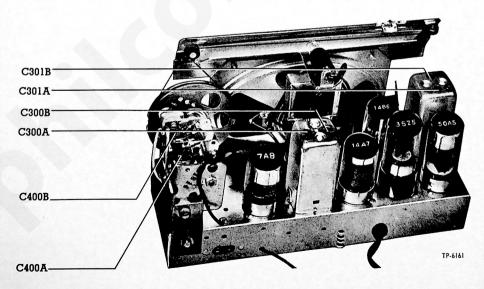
TOP VIEW, SHOWING TRIMMER LOCATIONS 300
